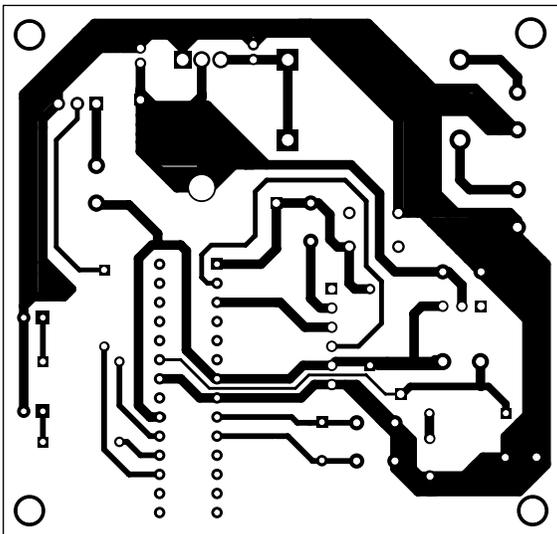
Actual-size PCB pattern of the bed-vacancy alarm system
